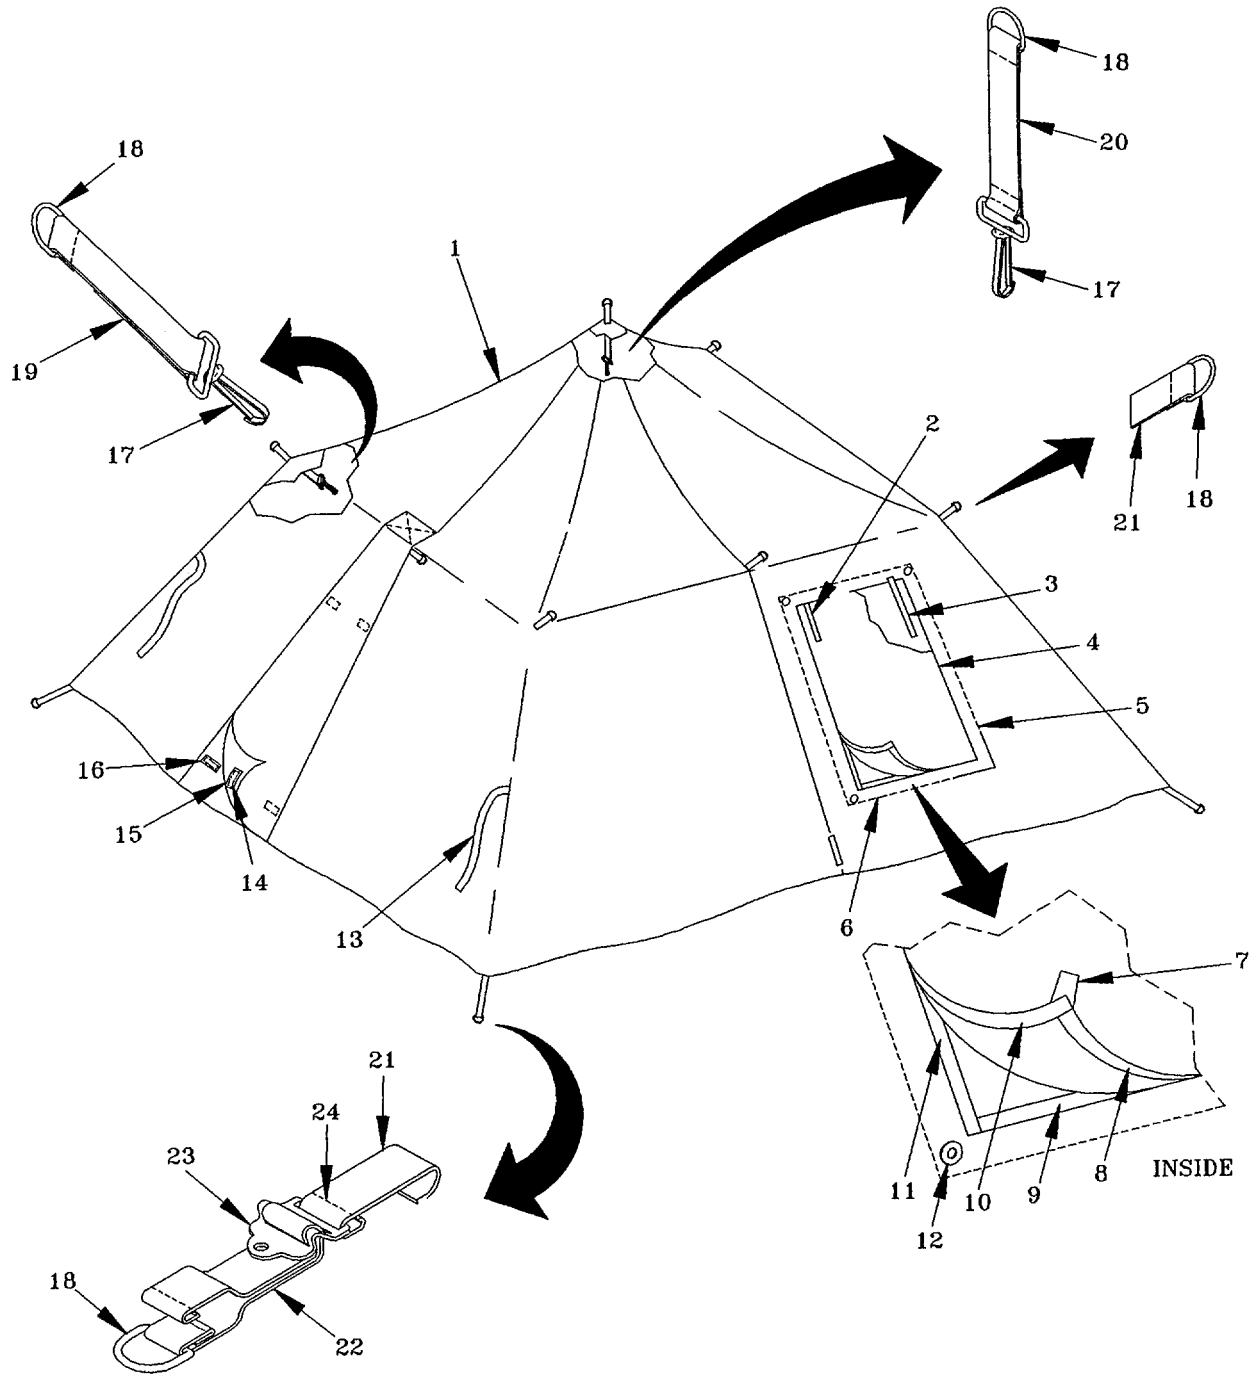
LINER ASSEMBLY (Sheet 1 of 2)
